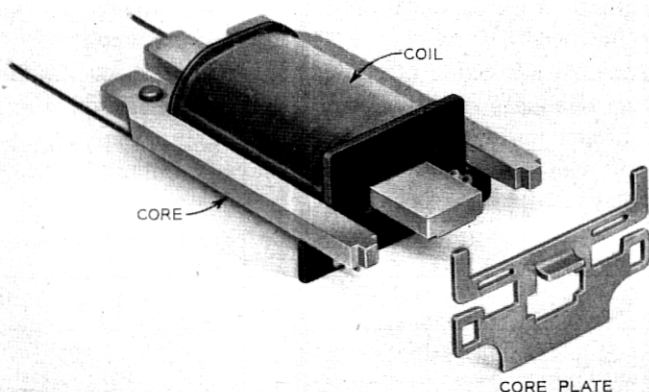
Legs of the core are held in alignment by the core plate, which is forced over the ends after the coil is assembled.
